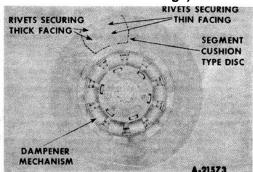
Cushion Type Driven Member (Half of Rivets Hold Thin Facing and the Other Half Secure Thick Facing to the Disc)
